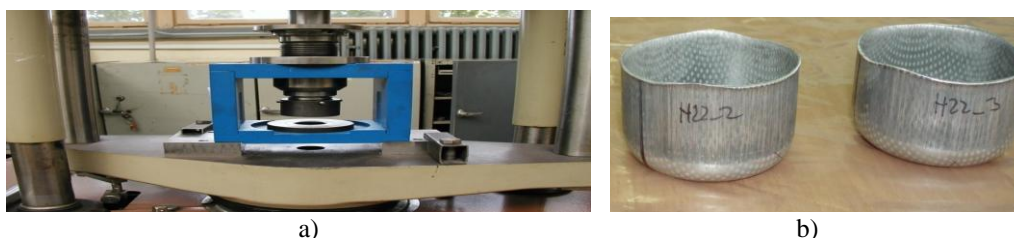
Tool for earring test (a), cups from material 3 (b)
